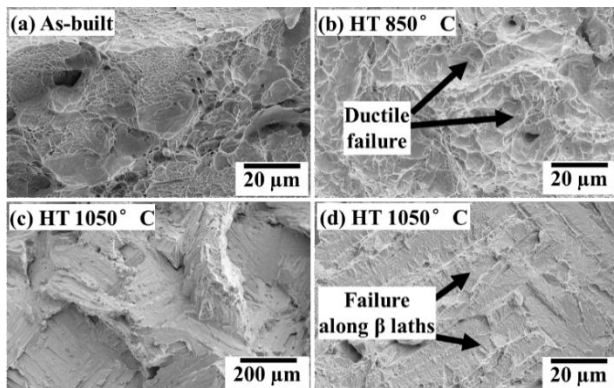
SEM images of the fractured surfaces of (a) As-built, (b) HT-850 °C, and (c), (d) HT-1050 °C tensile test pieces.
